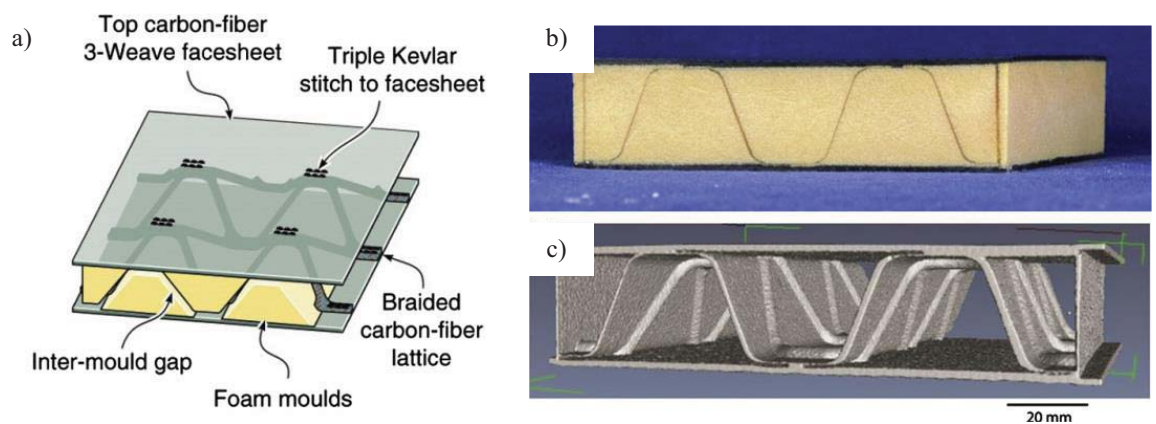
a) The hybrid CFRP pyramidal lattice core sandwich panel assembly, b) Photograph of manufactured sample and c) x-ray image showing the interior core structure of the panel [37].
